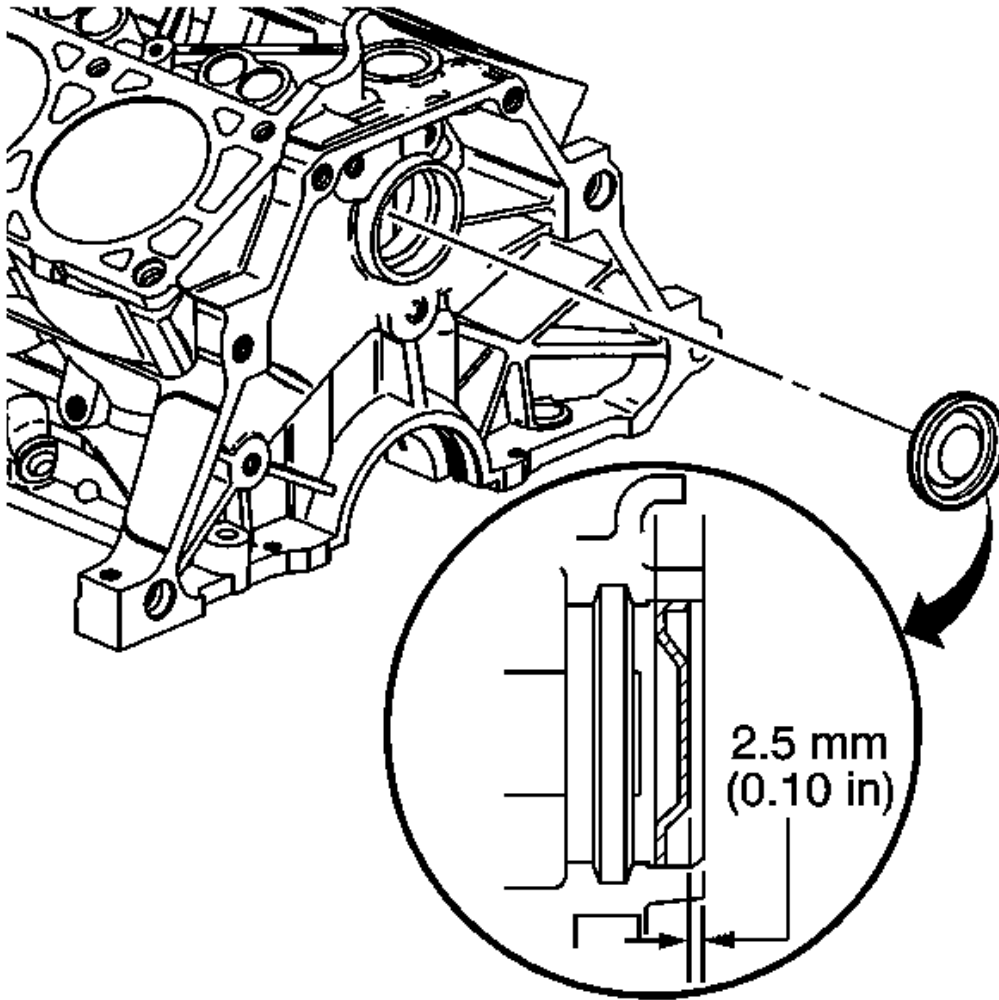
Identifying Camshaft Rear Bearing Hole Plug Installation Depth
